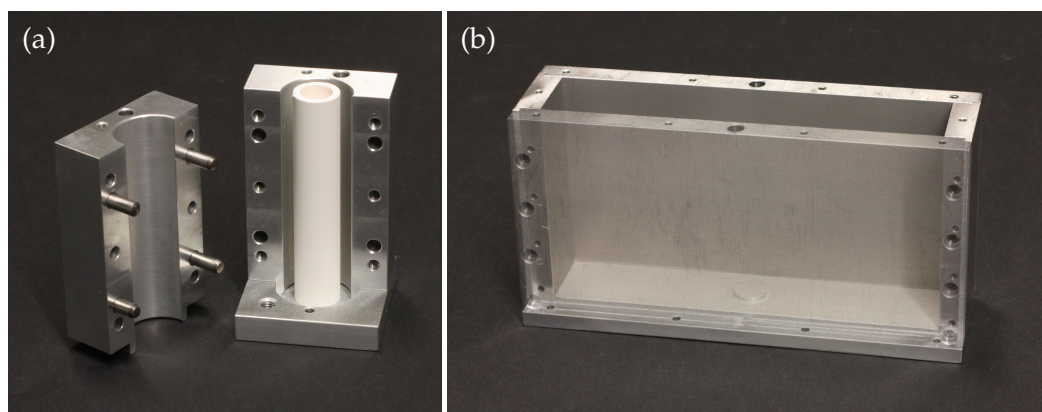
Molds for fabrication of all-solid-state core-shell cloaks. (a) Mold for casting the PDMS shell around a near-zero diffusivity core (Accuflect® B6 core inside the mold for illustration). Cylinder height is 8 cm (b) Mold for casting the solid PDMS surrounding. Inner dimensions are  $15 \times 8 \times 3 \text{ cm}^3$ .
